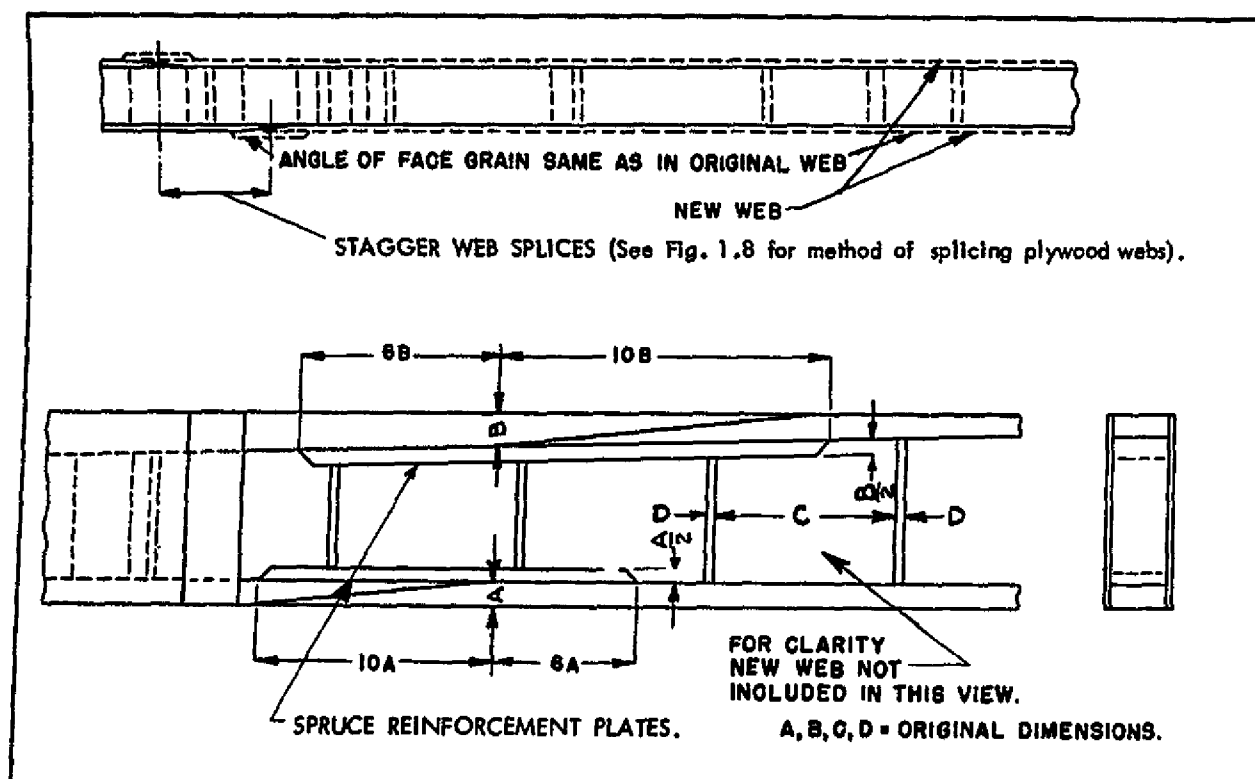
Method of splicing box-spar flanges (plate method).
